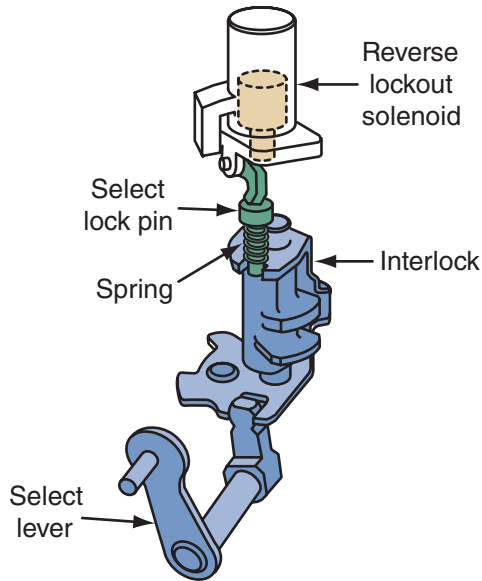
A PCM-controlled reverse lockup assembly.
